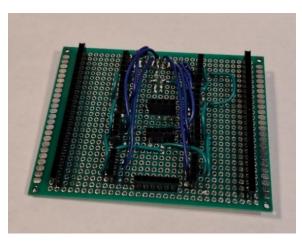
Mk.3 Upper prototype PCB wiring (Top)
